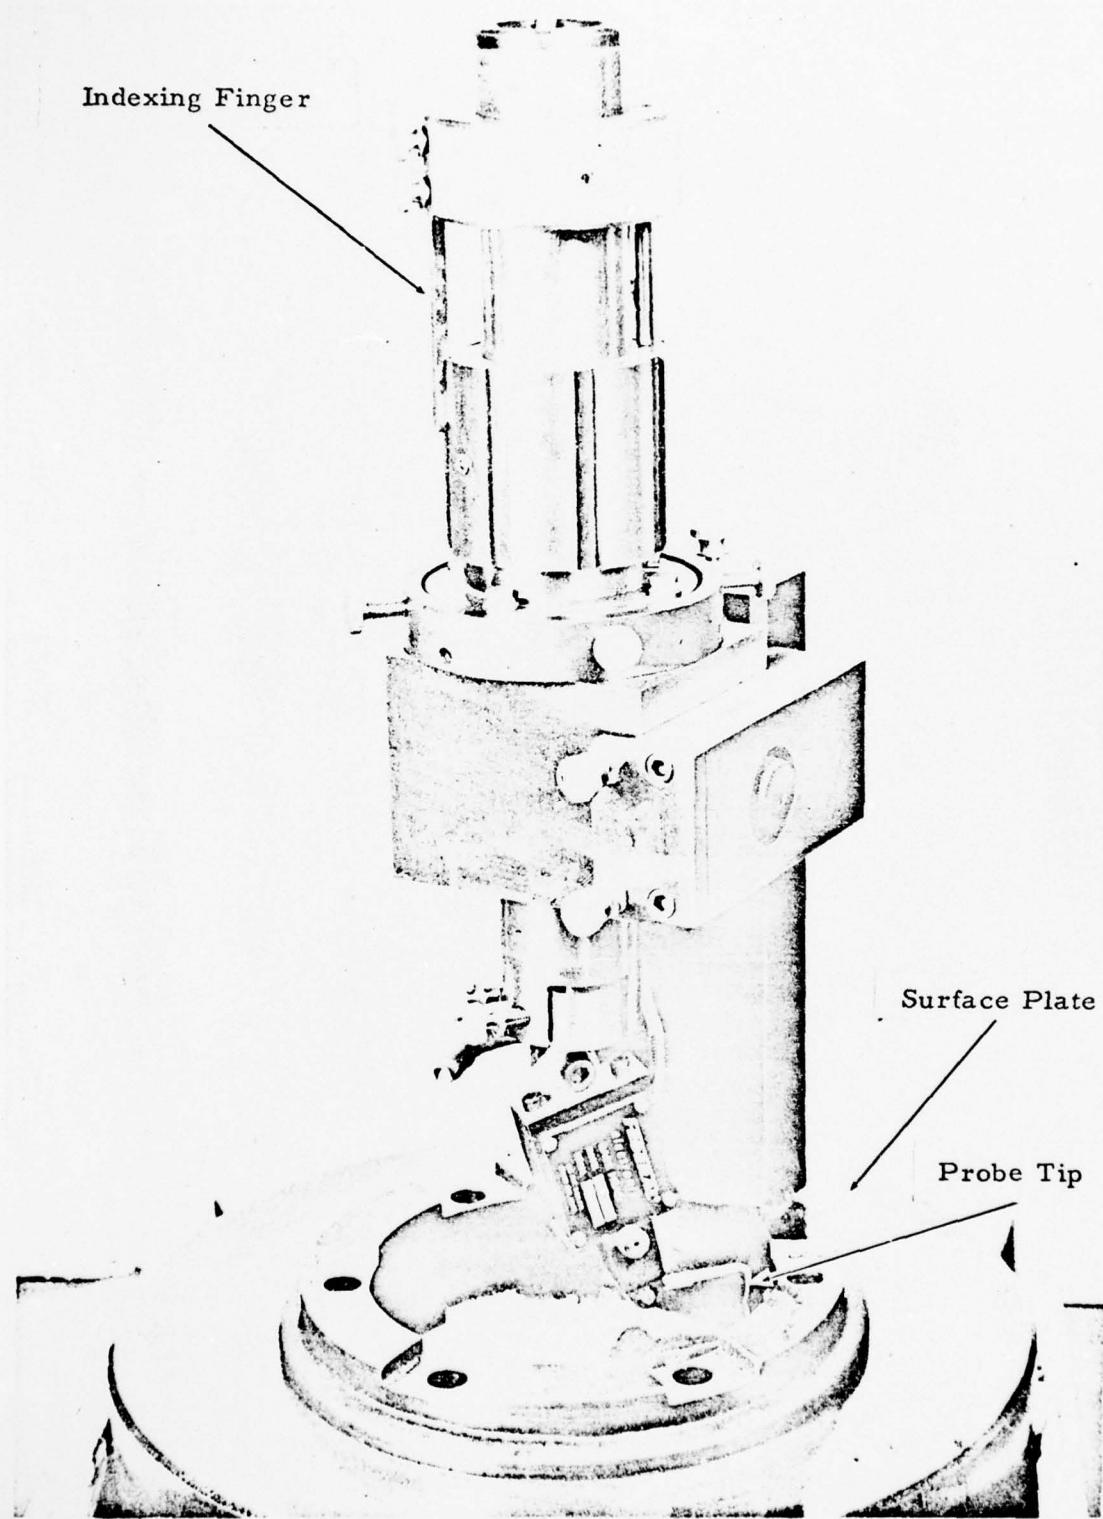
SQUARE GAGE ON FLAT SURFACE
